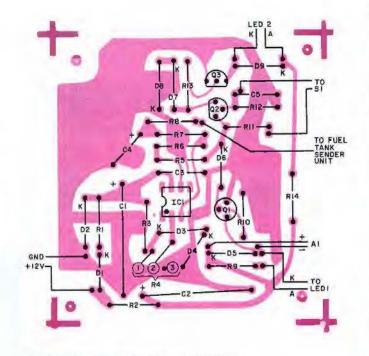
Actual-size etching and drilling guide is shown at left. Component placement guide is above.
